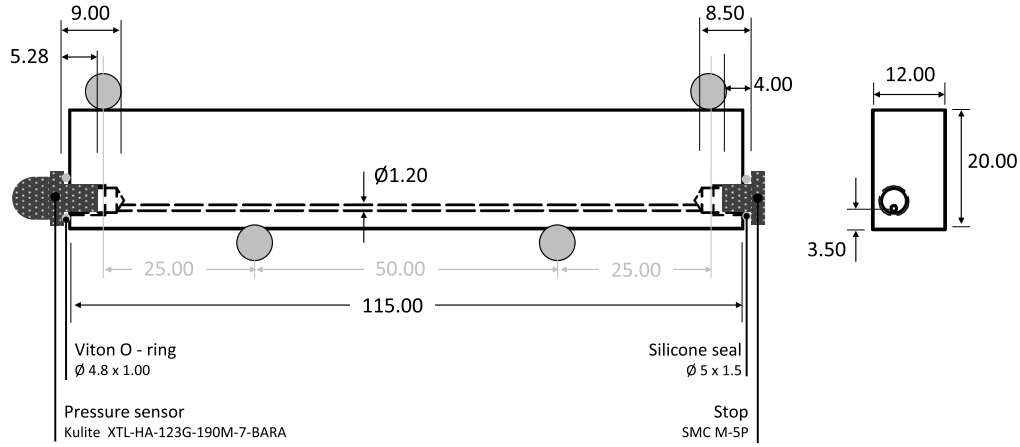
Dimensions of the metal additive manufactured four point bending test specimen (in mm).
